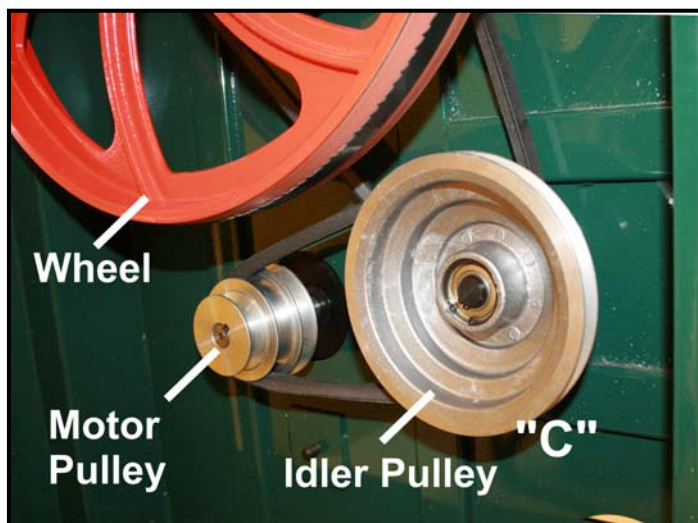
Shows the Pulleys and the Wheel Inside the Cabinet
